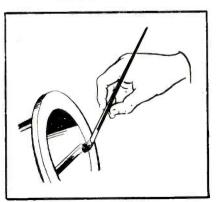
Flux should never be added to the tip of the iron but to the part to be soldered.
